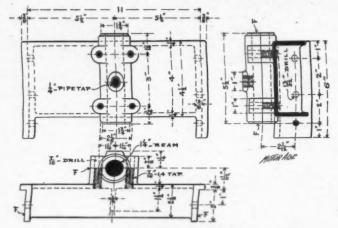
AUXILIARY DRIVING SHAFT BRACKET.
